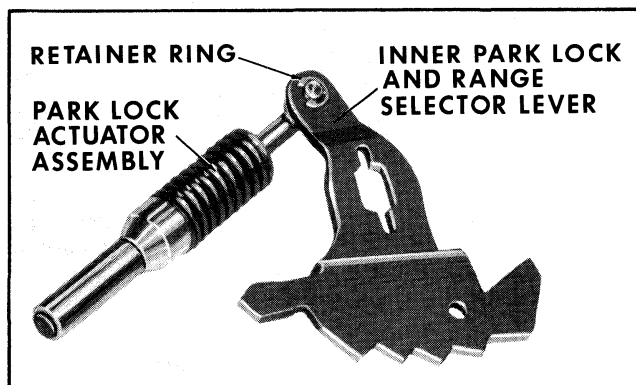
B-69 Park Lock Actuator and Range Selector Lever Assembly
